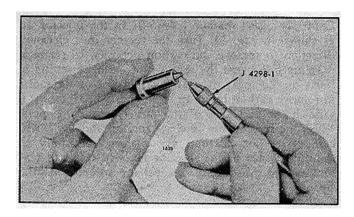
Cleaning Spray Tip Orifices using Tool J 4298-1
